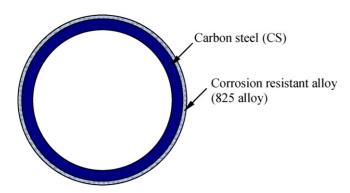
Cross-section of a bent tube. Clad 825 steel layer thickness is $2\,\mathrm{mm}$ and the carbon steel core is $5\,\mathrm{mm}$ thick.
